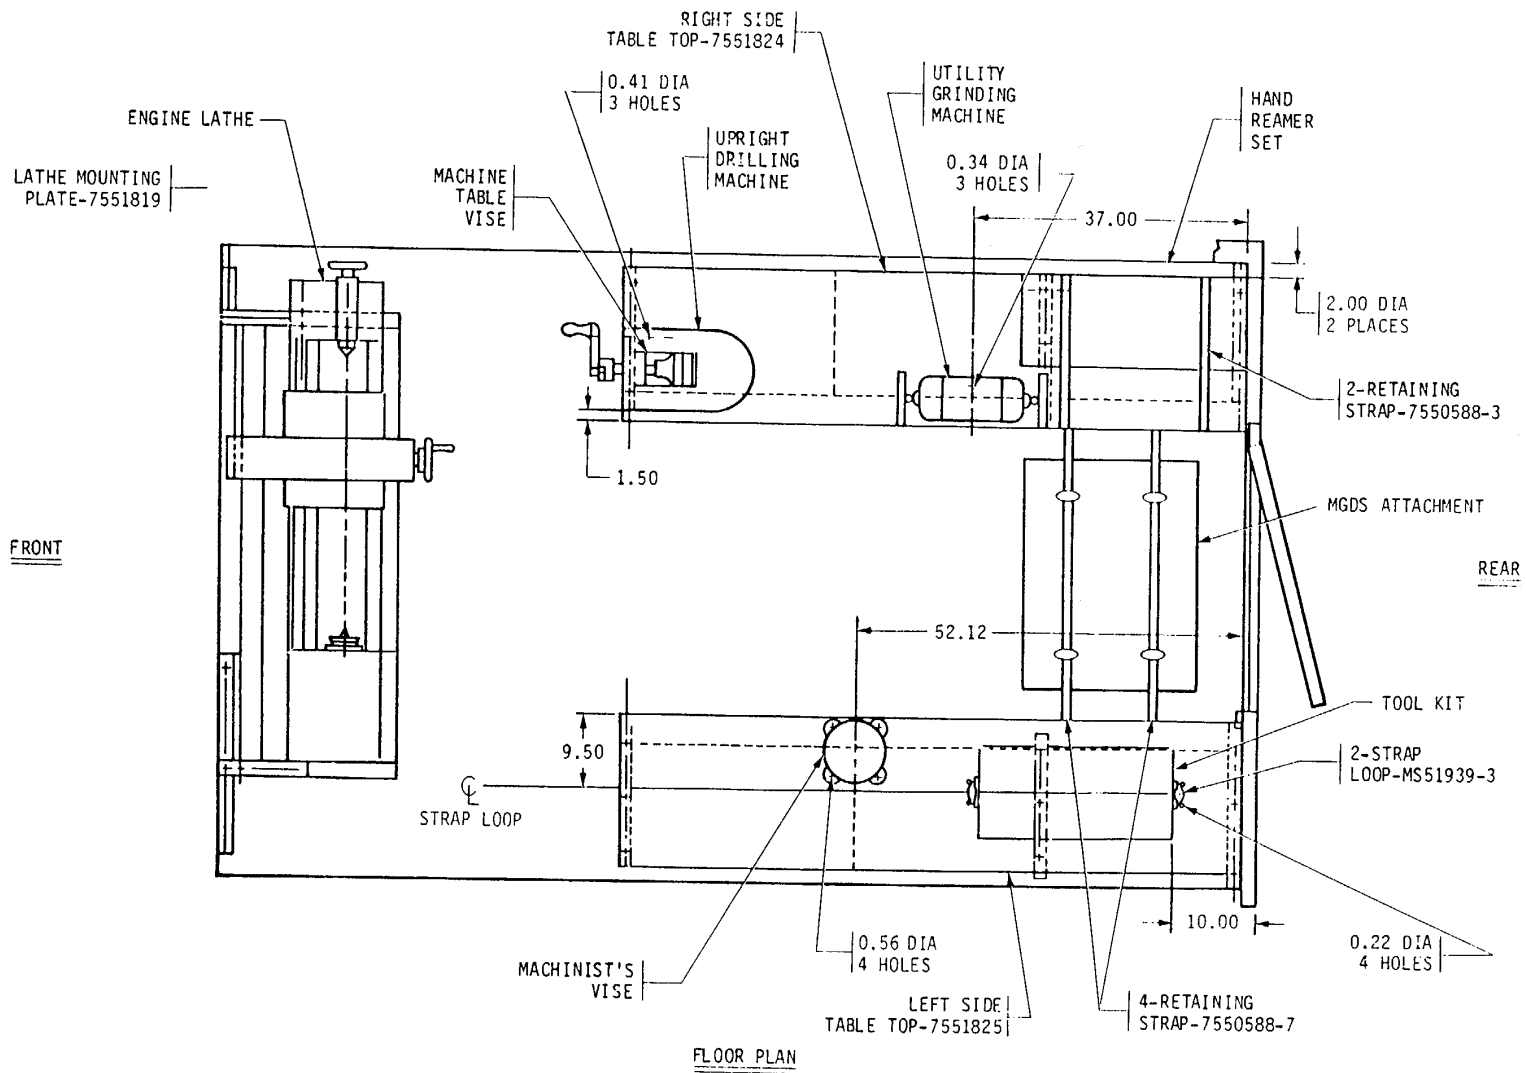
Components to be mounted, unit 1, 280, floor plan.
